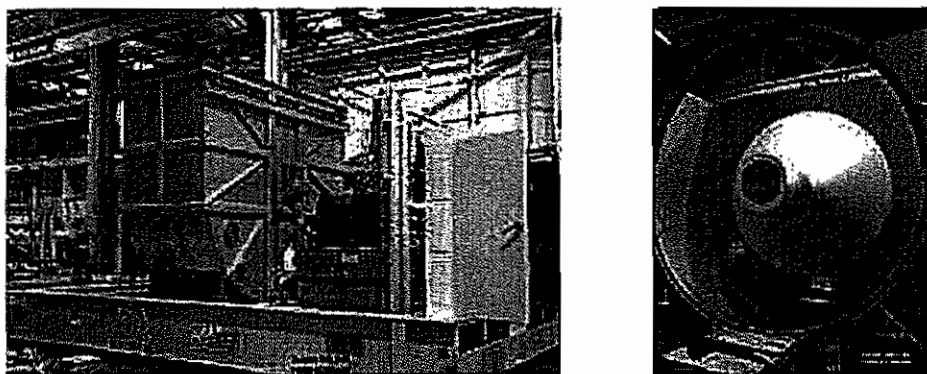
Gas Turbine Mechanical Handling
